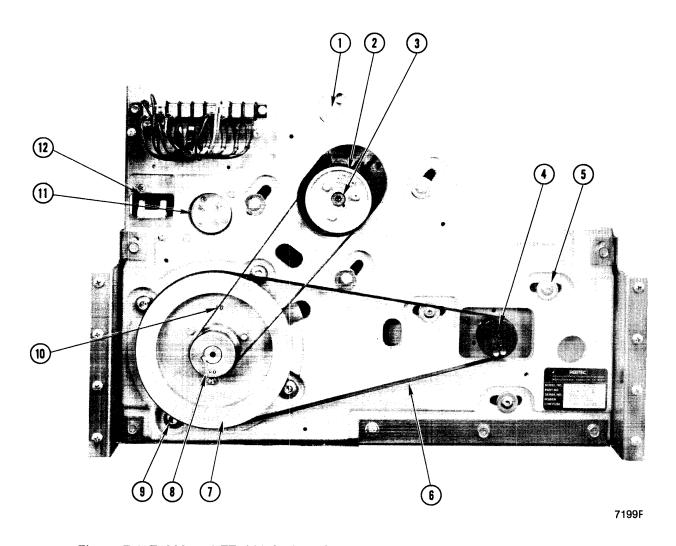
T1000 and FT1000 Series Photo Parts Index, Power Supply, Rear View
